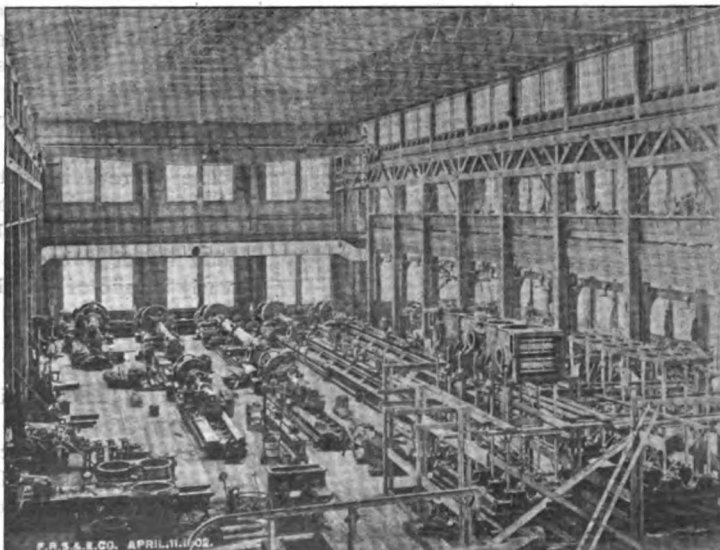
ONE END OF MAIN MACHINE SHOP.
